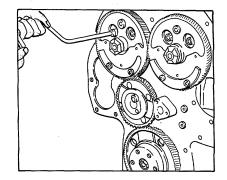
Removing or Installing Thrust Washer Retaining Bolts
